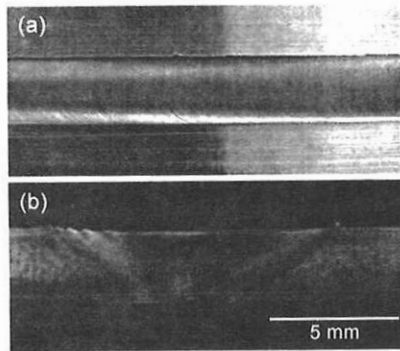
Optical micrograph of 3mm thick joint welded at a rotation speed of 1500rpm and welding speed of 500mm/min : (a) surface appearance and (b) cross-sections perpendicular to the welding direction.
